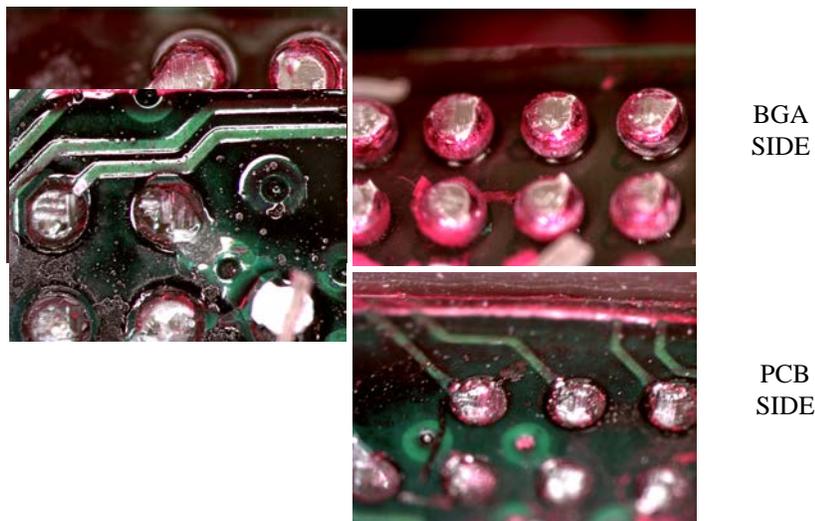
Dye and Pry images from BGA & PCB side, with no penetration in the solder joint
